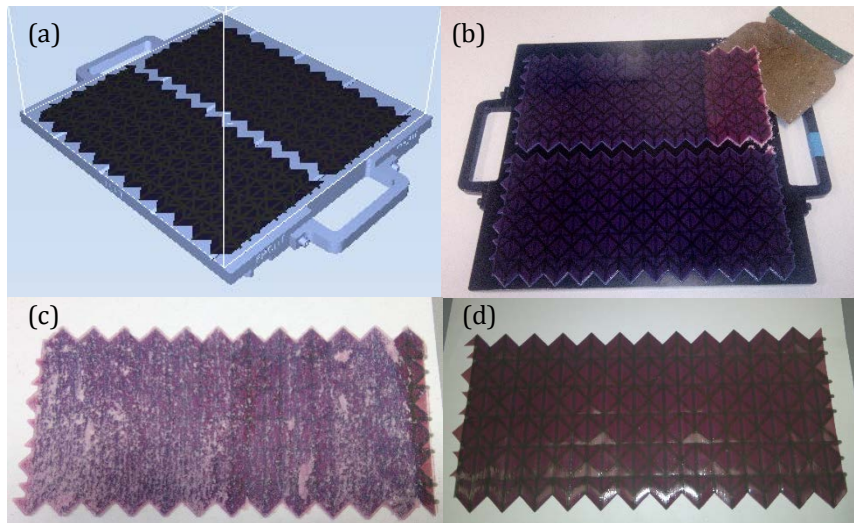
Base sheet 3D Printing process (a) Sheet placing and material assignment (b) removing the 3D printed sheet from the printer's tray (c) the support material has to be scraped from the 3D printed sheet (d) Final base sheet after 3D printing and cleaning
